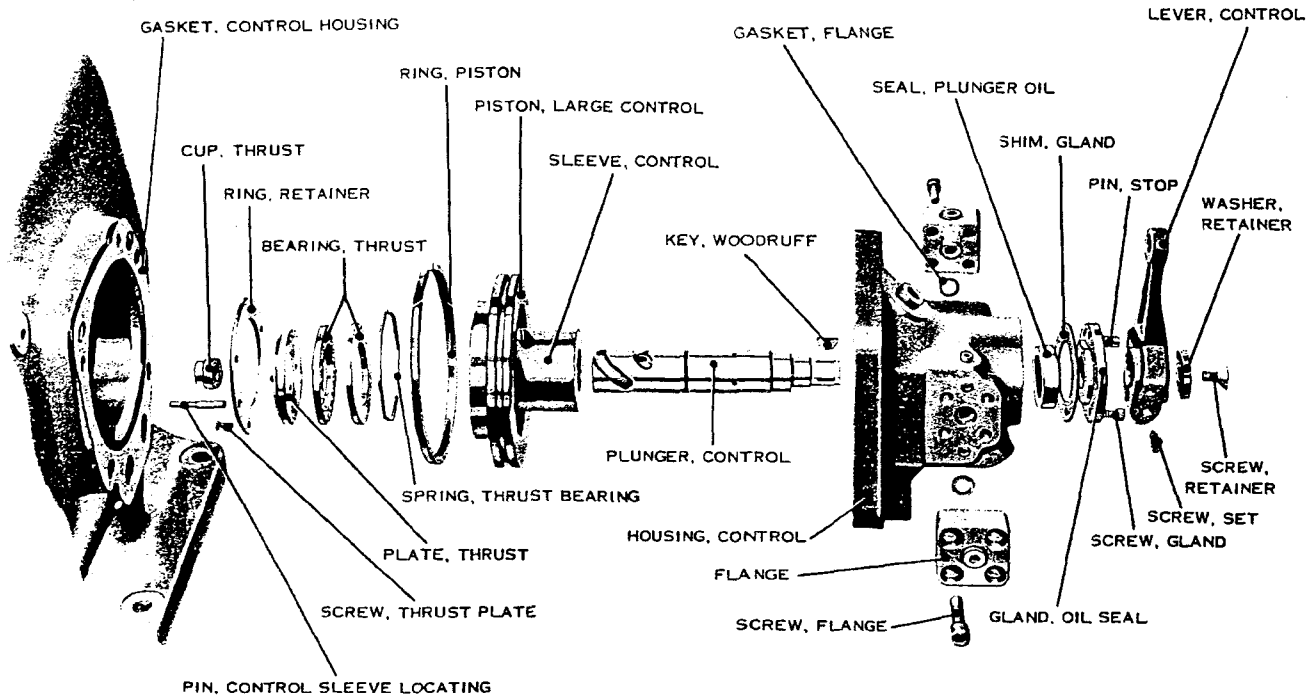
Standard Type "H" Servo-motor Lever Control-Exploded view (53253).
